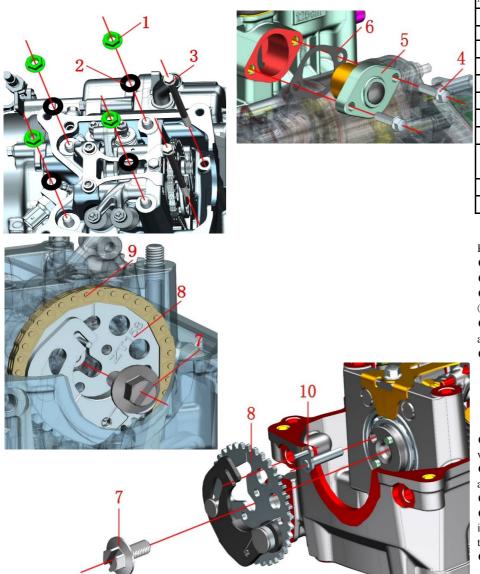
CYLINDER HEAD		Cylinder head cover assembly-1	CHK	(0)
